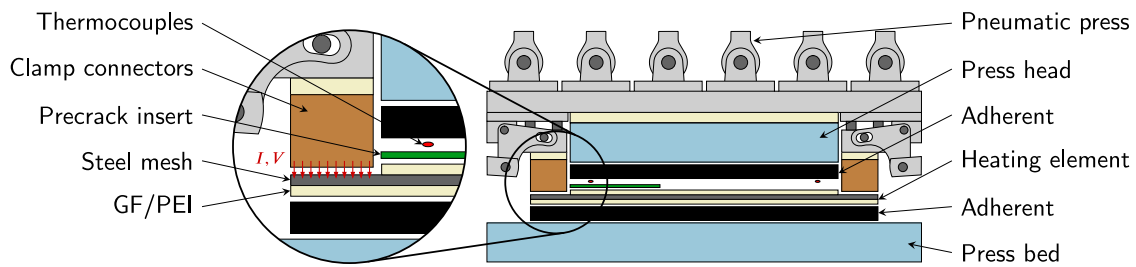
Schematic of the welding process outlining the location of the individual components of the sample, the pressure application tool and connection of the heating element to the power supply unit during the welding process.
